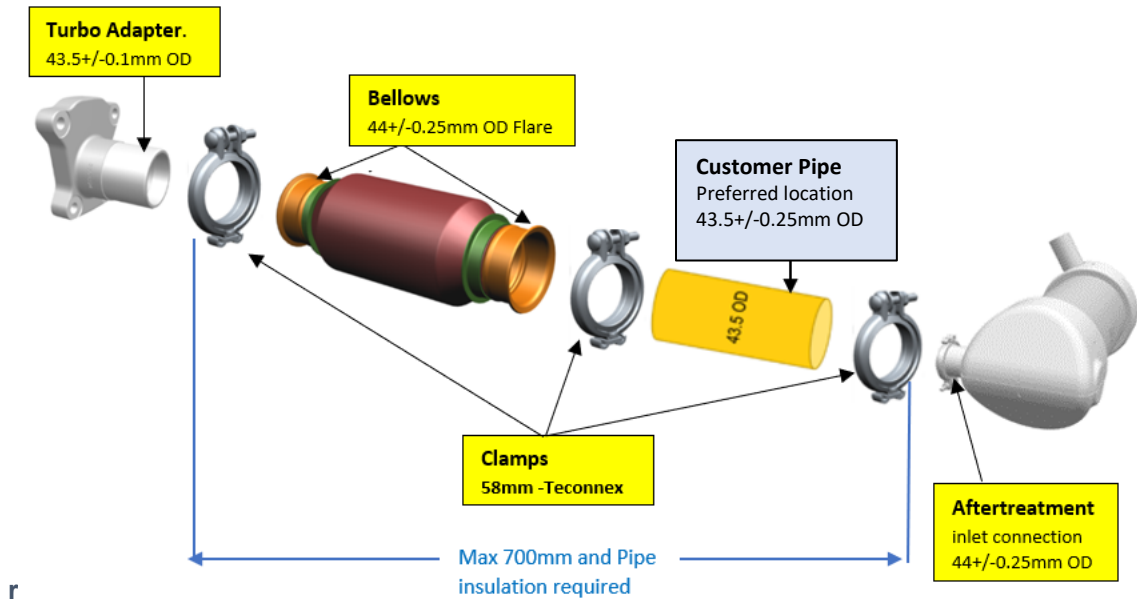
Flexpipe Kit with preferred customer pipe location
